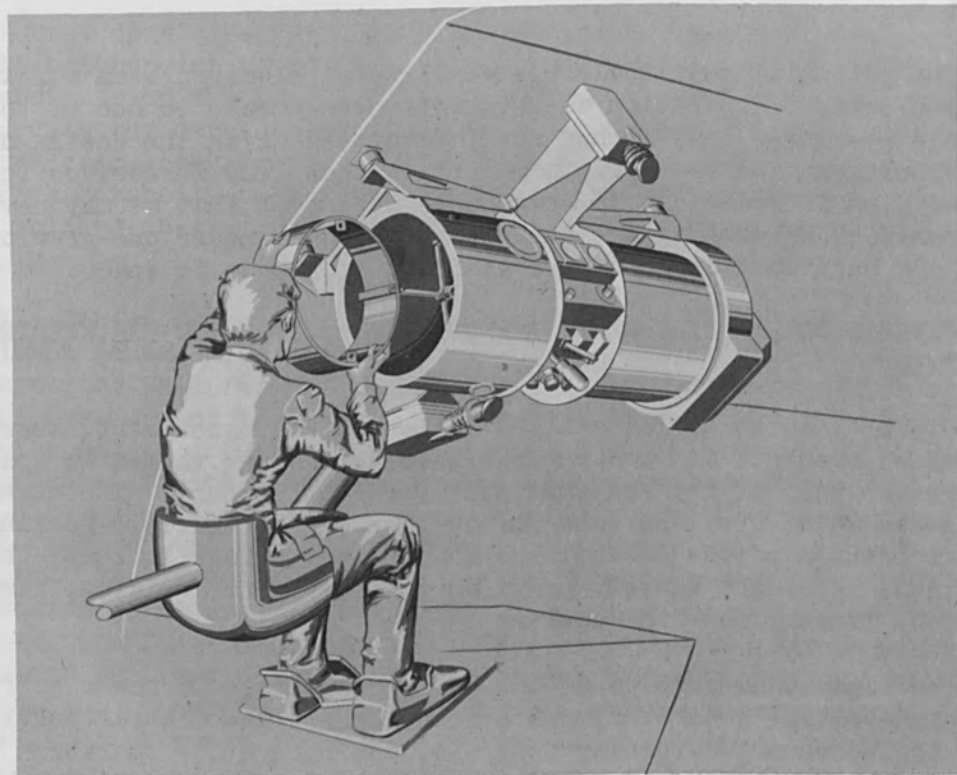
Artist's illustration of an astronaut removing a weld specimen from the welding chamber.
